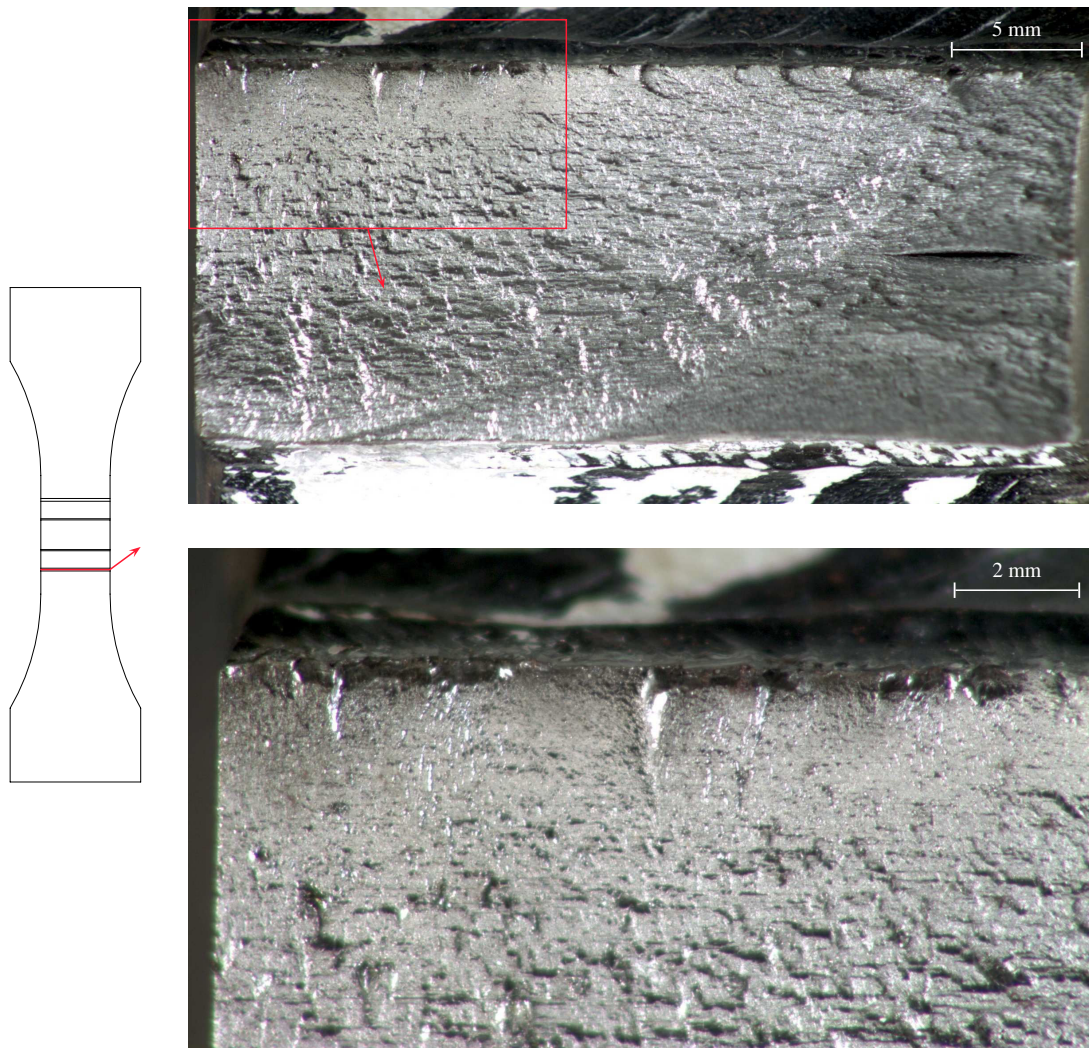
Fracture surface of a welded assembly treated by HFH and broken in the hammered zone.
